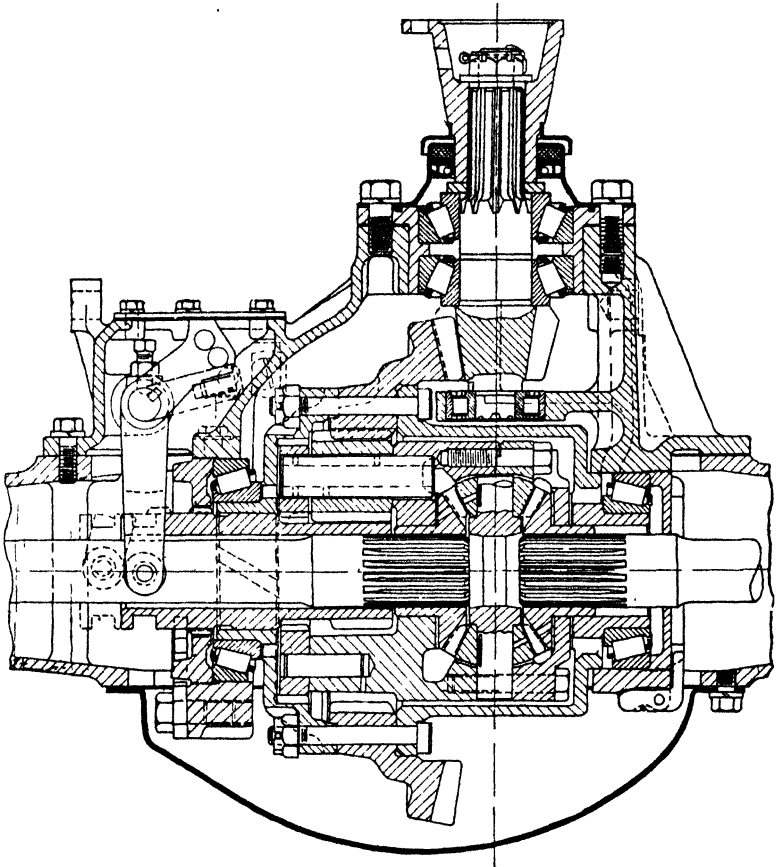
GEAR ASSEMBLY OF EATON TWO-SPEED AXLE.
